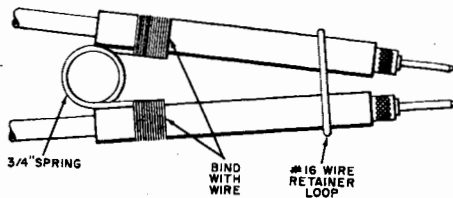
Tweezer assembly can be fastened by securing electrode holders to torsion spring.
